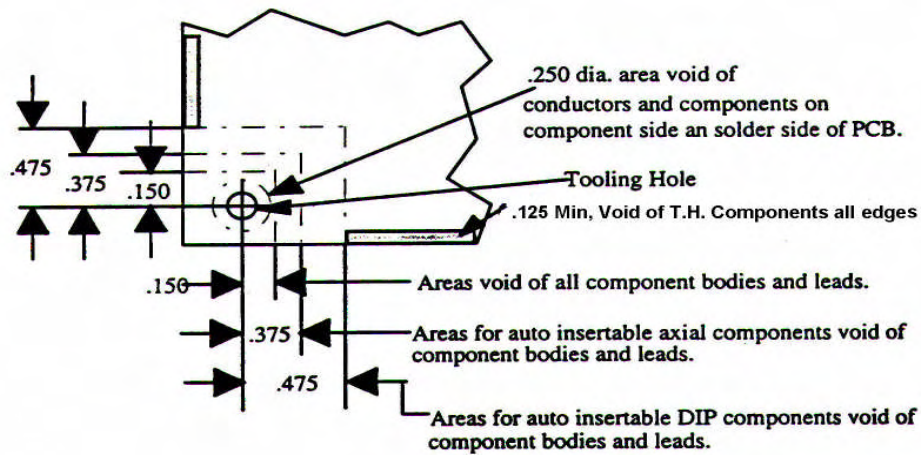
Tooling Hole and Edge Clearances for Through-Hole DIPs and Axials
